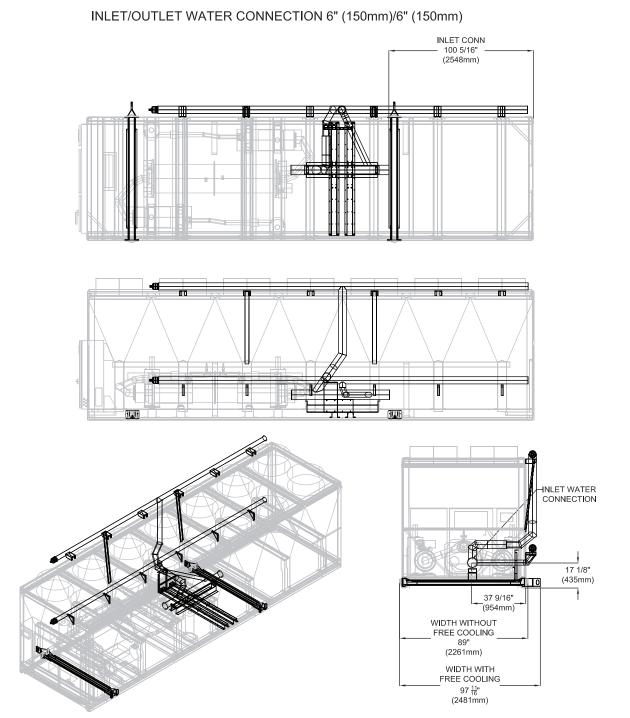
RTAF unit dimensions -200, 215 ton units with free-cooling
